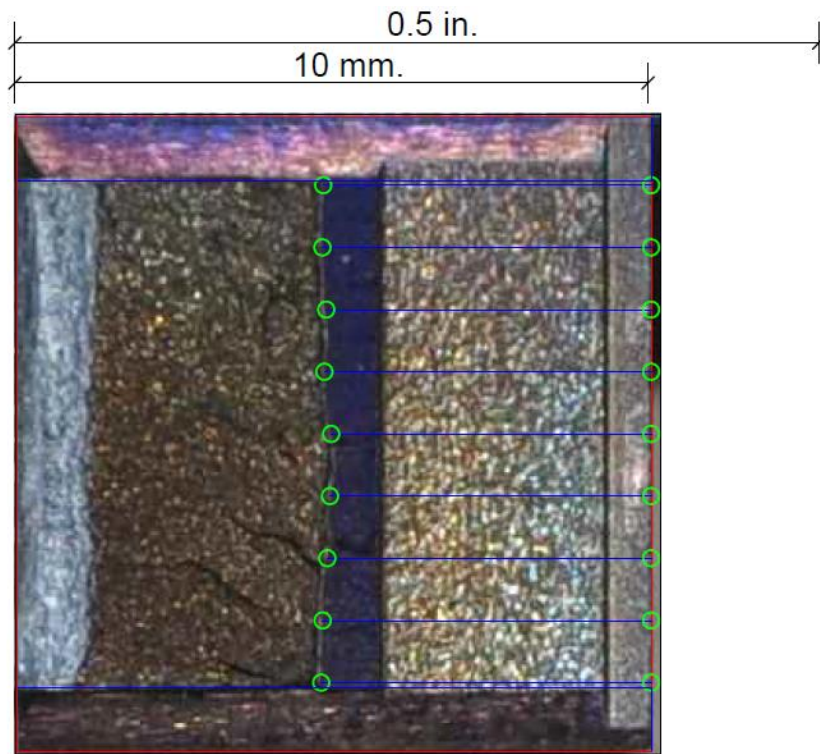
Specimen A18' Fracture Surface
